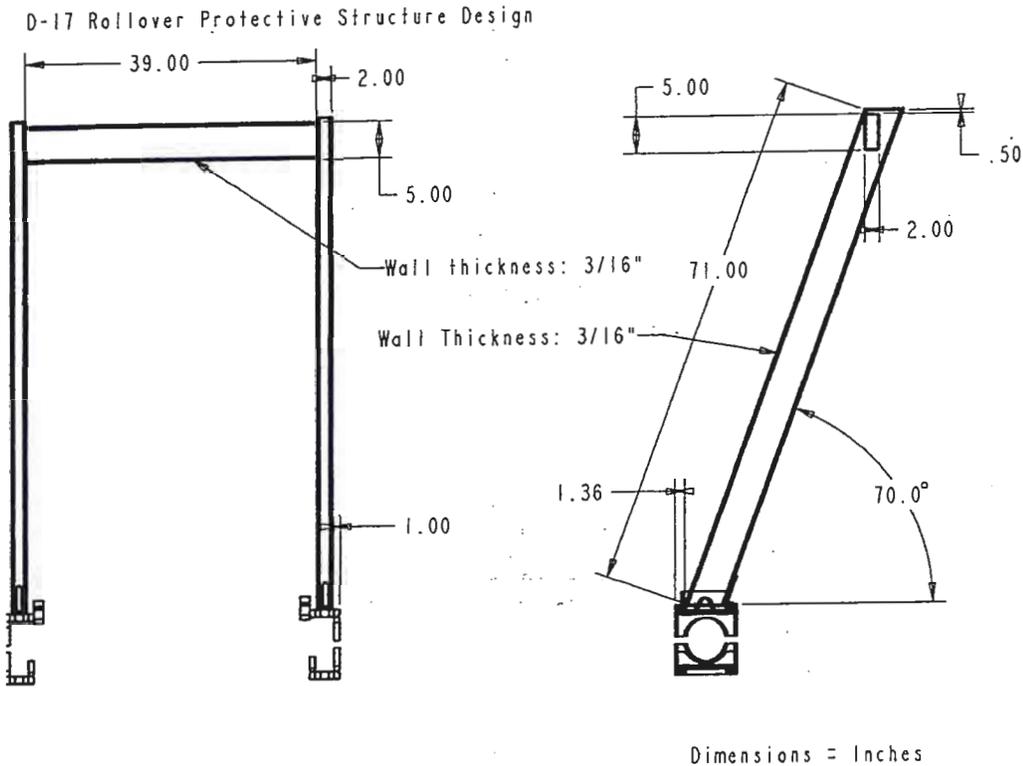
Assembly drawing for the Allis Chalmers D17 ROPS.
